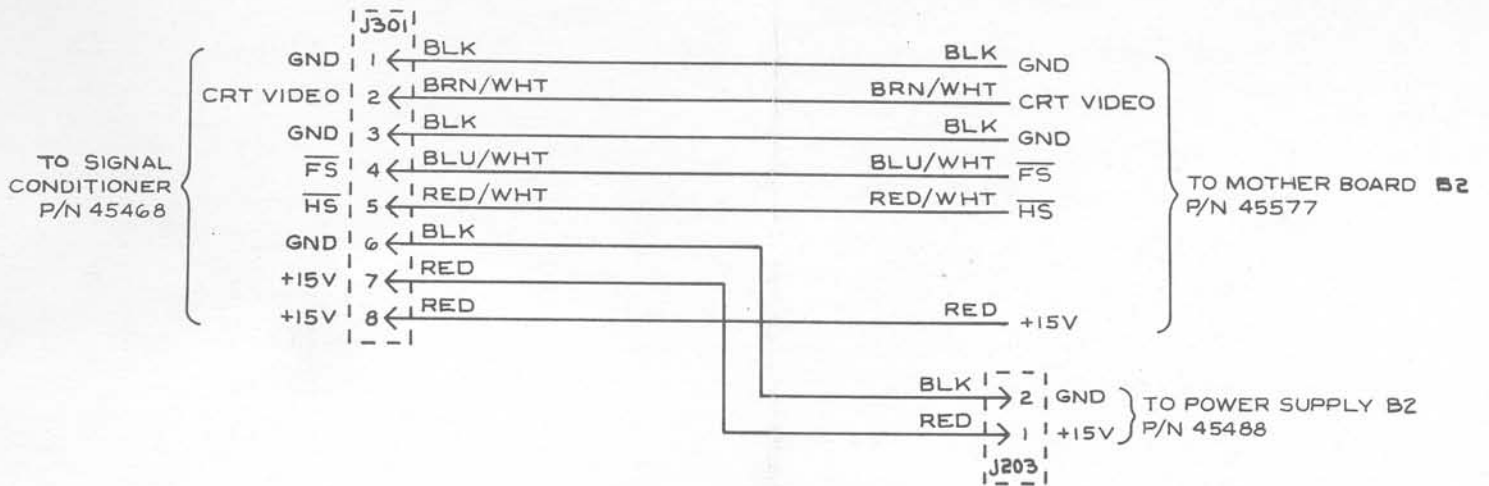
Motherboard-to-CRT Cable Assembly (Part No. 47110)
